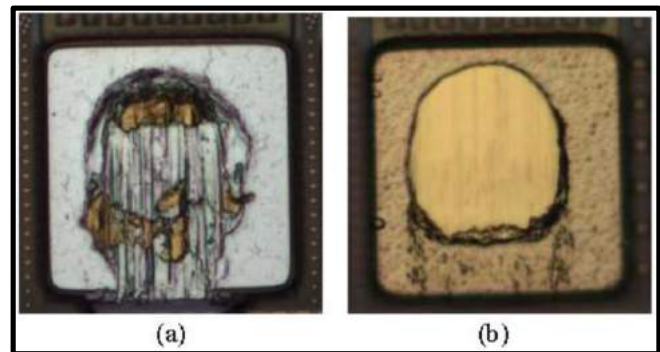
(a) Aluminum Bond Pad after Gold Ball Bonding and Shear Test, (b) ENEPIG Plated Bond Pad after Gold Ball Bonding and Shear Test.^[1]
